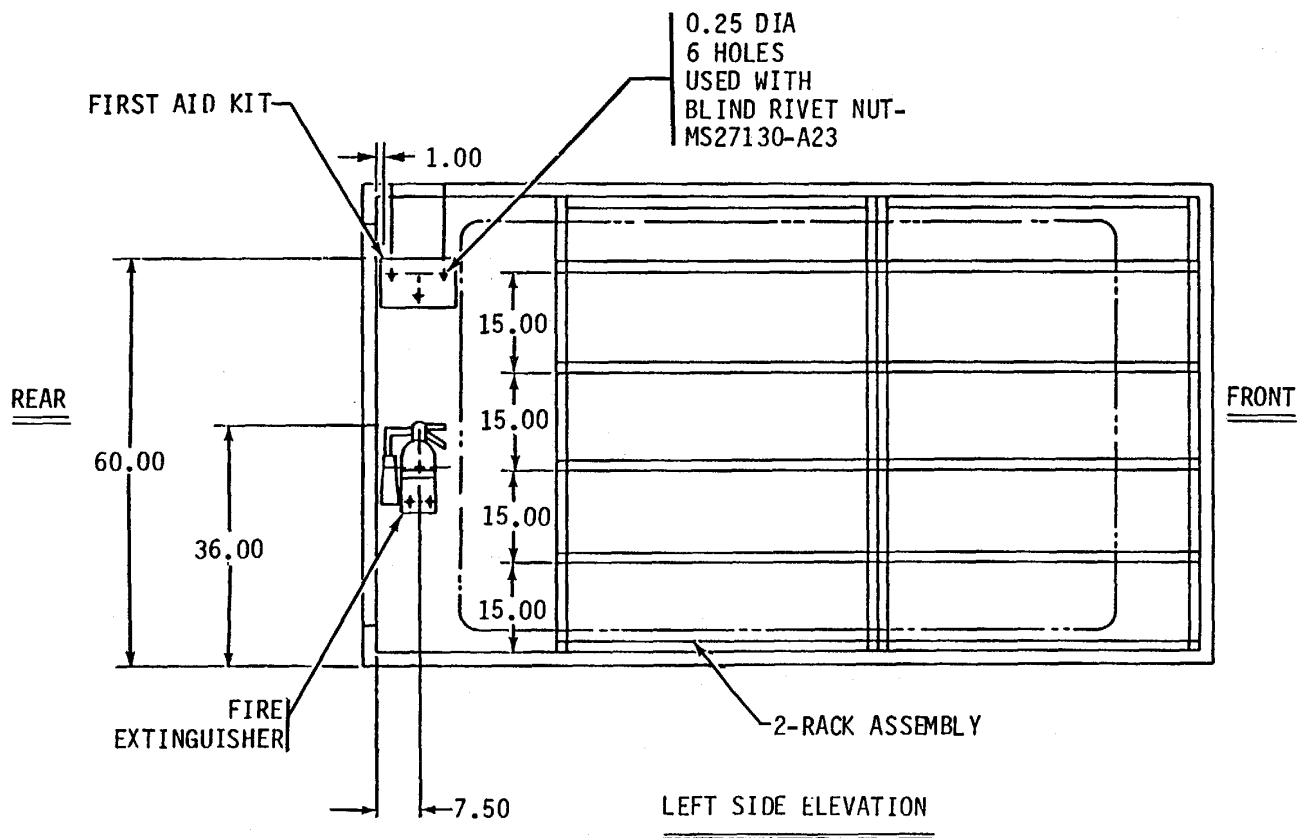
Components to be Mounted, Unit 1, 280, Left Side Elevation.
